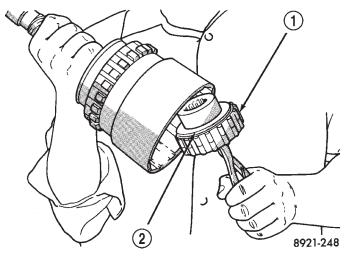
Overrunning Clutch Assembly Removal/ Installation
